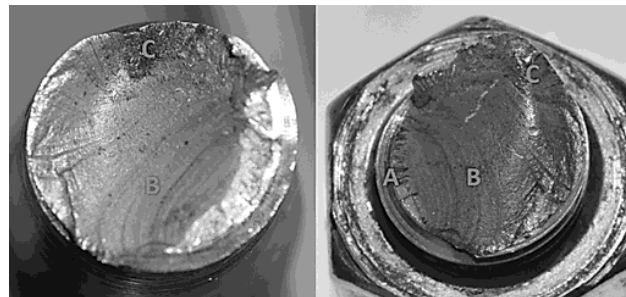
View of the fatigue fracture region of the RA shaft: A - beginning of the fracture, B - beach marks, and C - final region of the fracture
